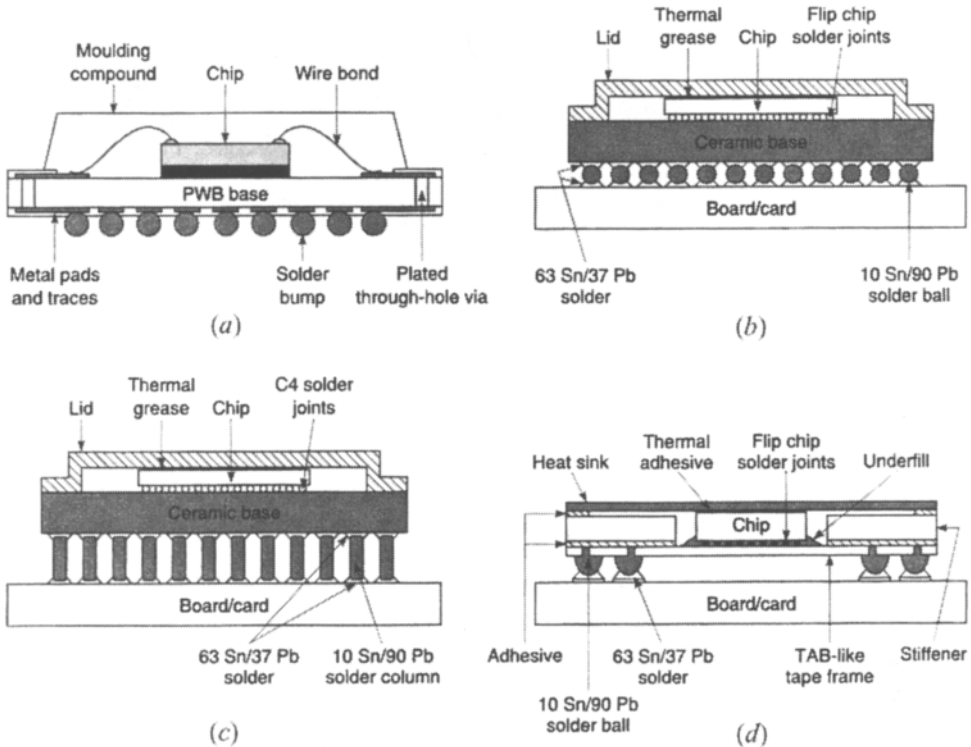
Examples of full matrix and perimeter array BGA I/O solder bumps.
